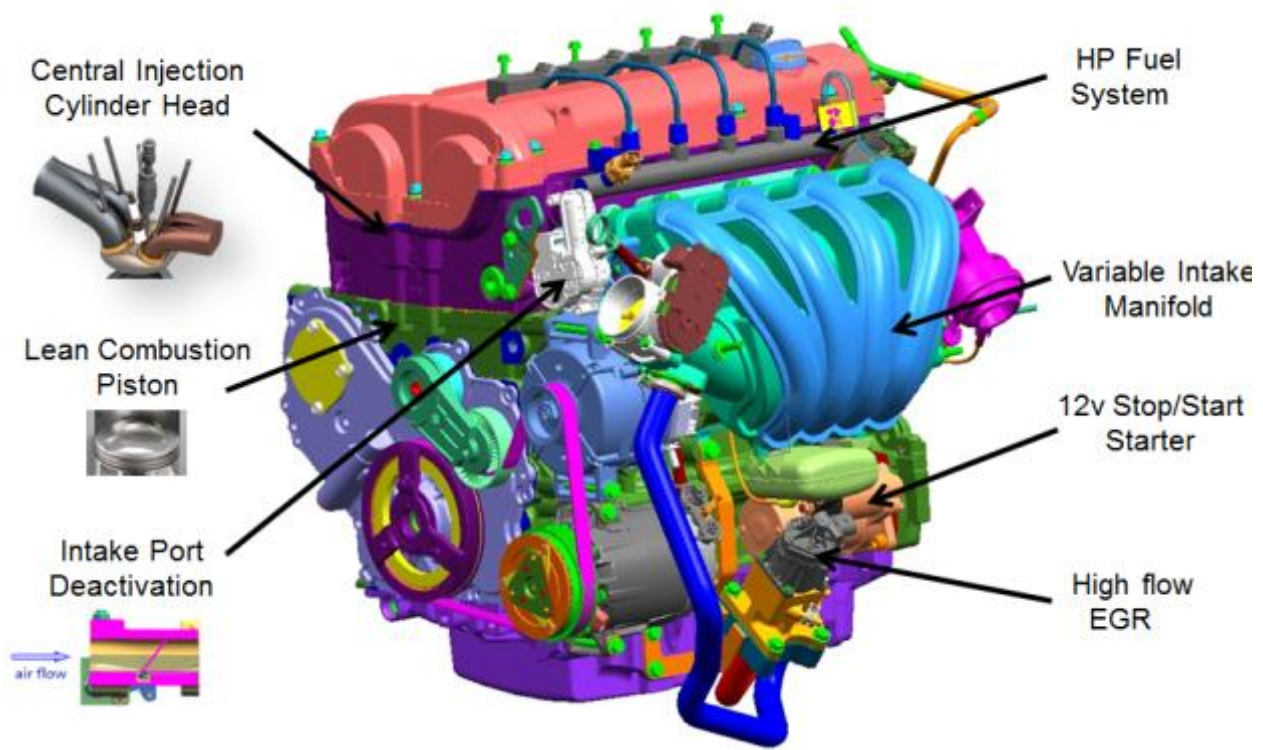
SG5 Engine Assembly and Refined Lean Combustion Enabling Features
